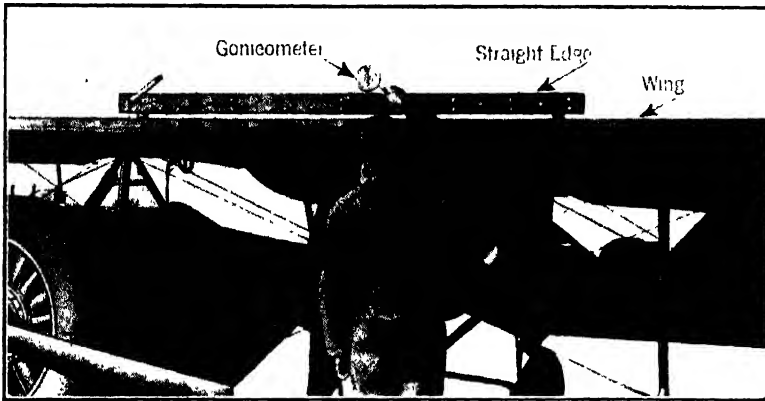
Using Goniometer and Straightedge to Check Wing Panel Dihedral.
